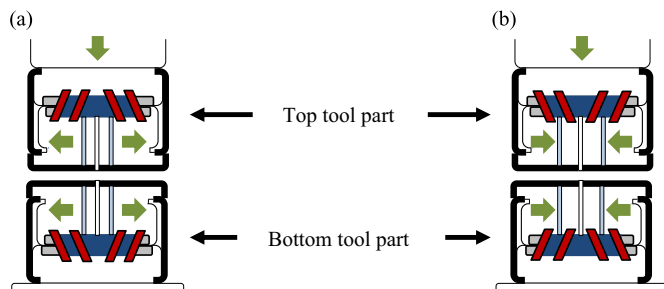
Principle of tool sets for the driving process which enables local material stretching (a) and shrinking (b): the split jaws of the top and the bottom tool move because of the conversion of the stroke force to movement in horizontal direction; depending on whether the jaws move towards each other or apart, compressive (b) or tensile stress (a) is induced.
